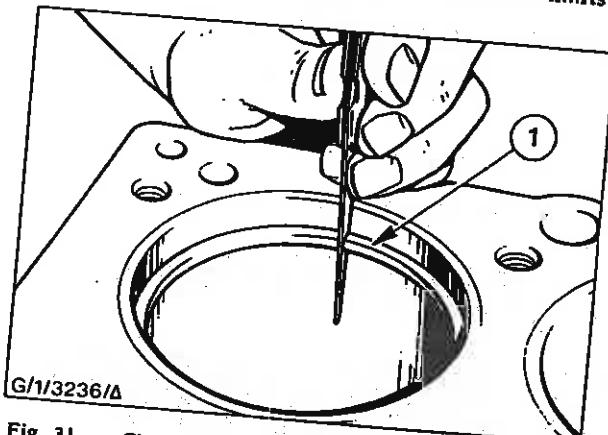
Checking Piston Ring Gap in Cylinder Bore
